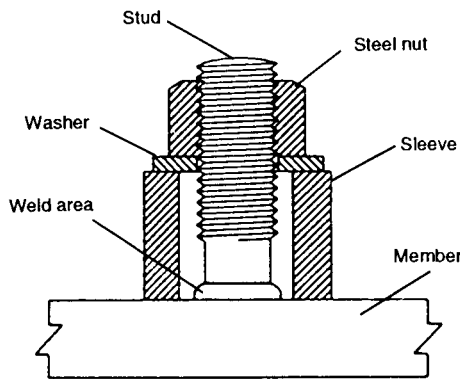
Typical torque testing arrangement. Studs that must undergo application qualification or preproduction testing should be torqued to destruction without failure in the weld. Proof torque testing during inspection of threaded studs should be applied at 60 to 66% of the yield torque load for the stud size testing. Refer to Tables 7 to 9. Source: Ref 2
